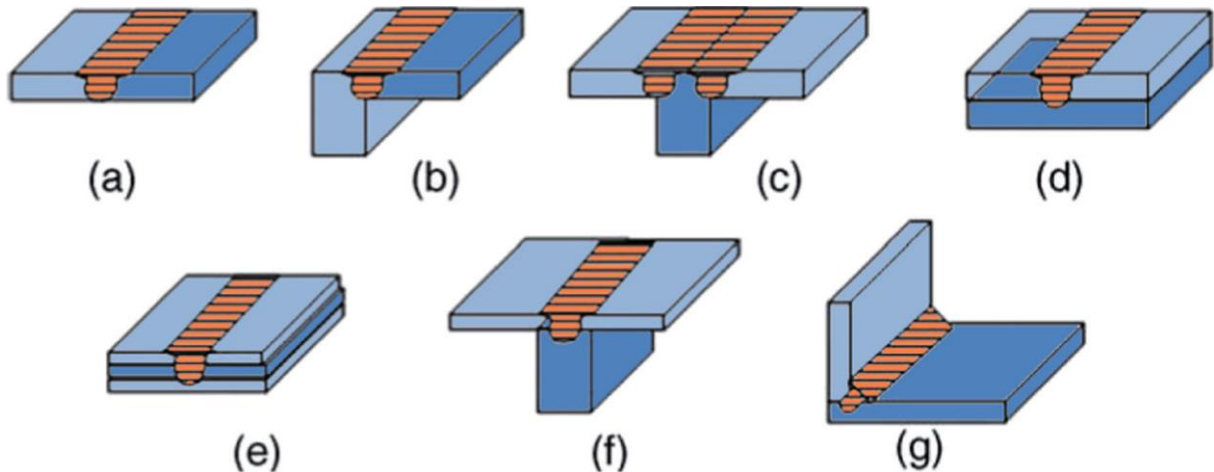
joint configurations utilized in friction stir welding: (a) square butt, (b) edge butt, (c) T butt joint, (d) lap joint, (e) multiple lap joint, (f) T lap joint, and (g) fillet joint.
